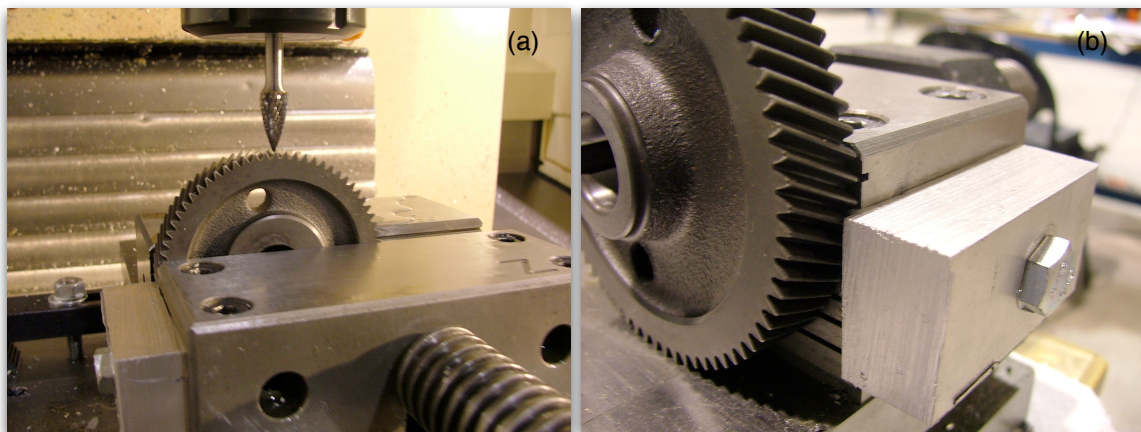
Gear tooth spall: (a) drilling process, (b) clamp device
